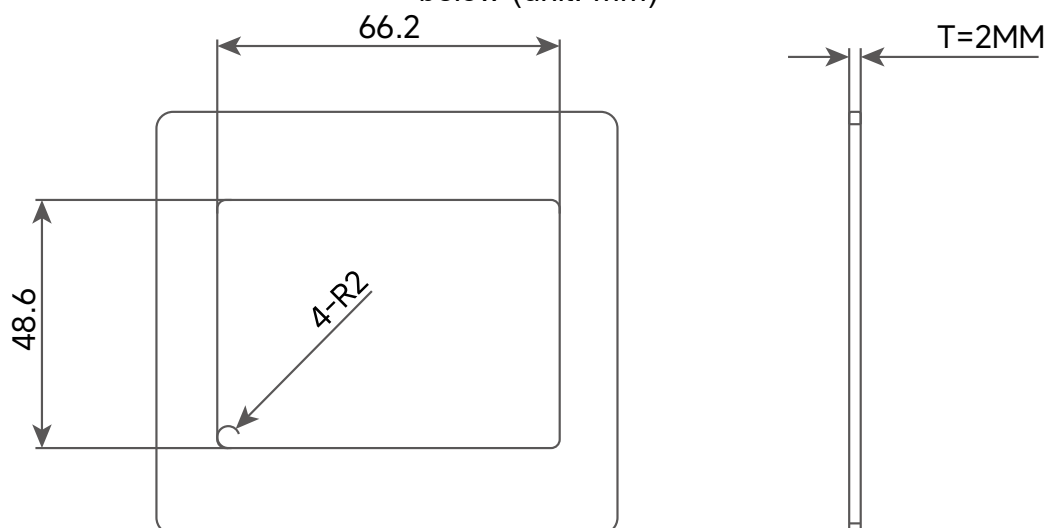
Dimensions of installation hole for keypad of 380V/22kW (220V/11kW) and below (unit: mm)
